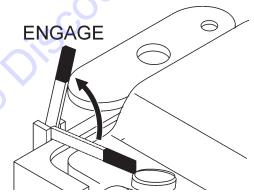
Transmission Engage/Disengage Lever (Engage Position)
